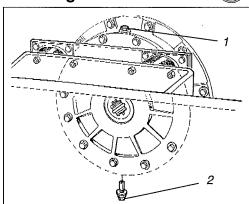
Right side of drum 1 Filling/drain plug 2 Level plug
